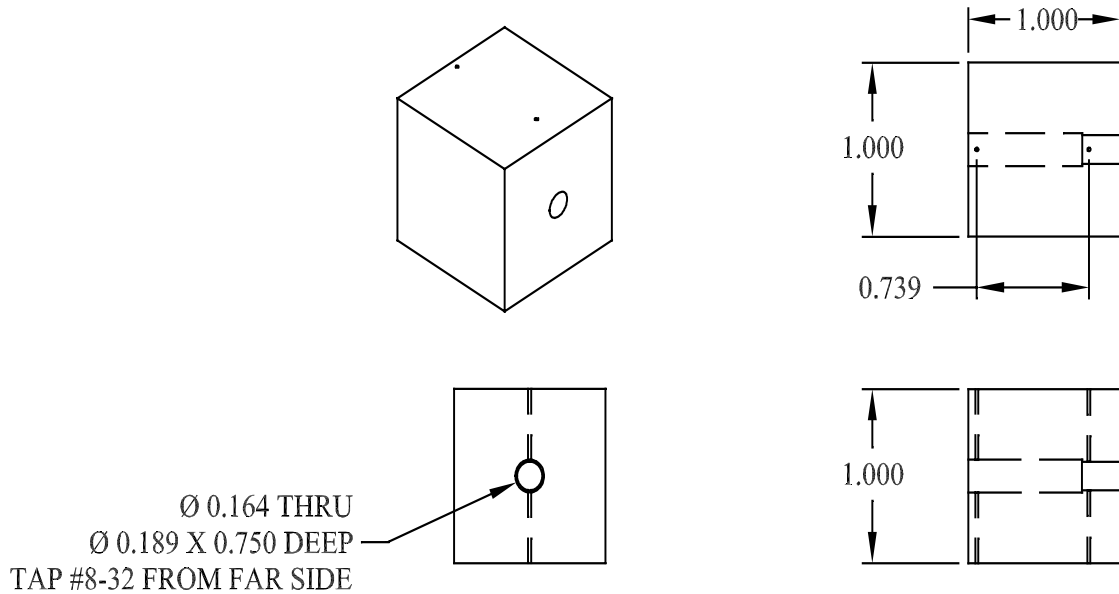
AutoCAD drawing of the fixture that holds the aluminum screw in place during machining.
